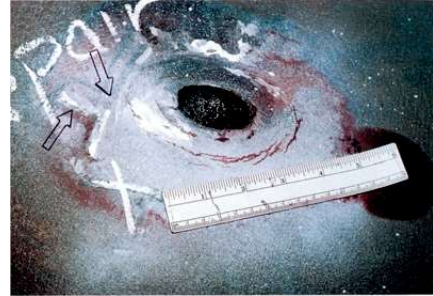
Cracking is generally characterized by the appearance of "stretch marks" around the weld in the base metal. The arrows identify prior weld repairs in the same area.
